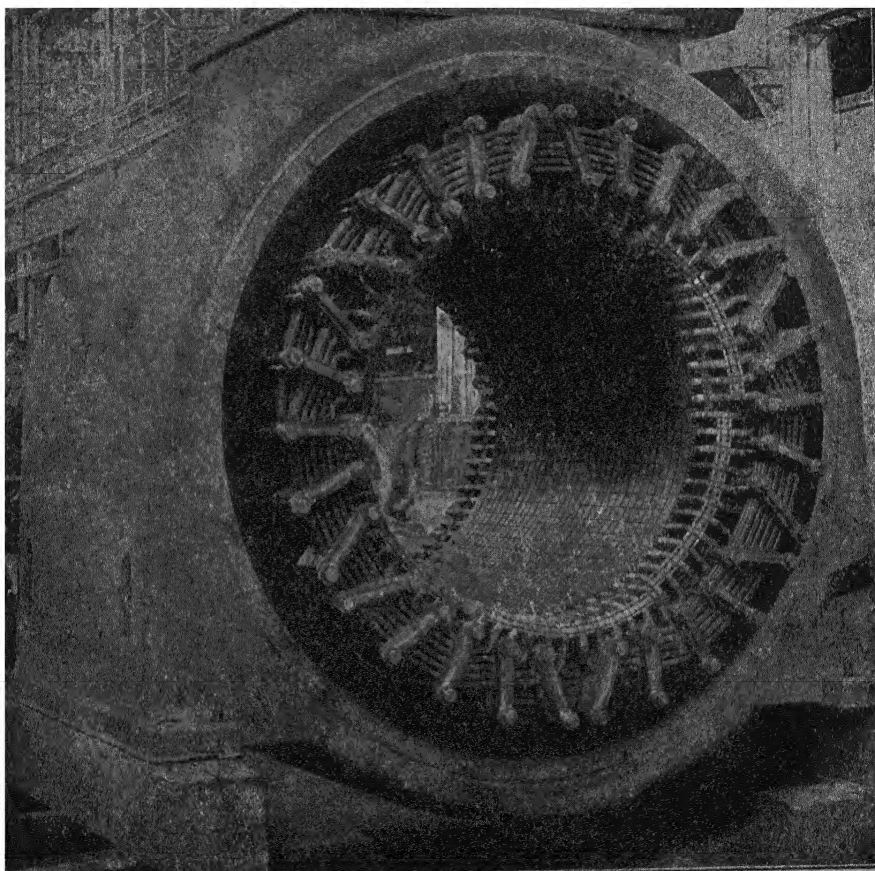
Turbo-alternator showing Clamping Arrangements.
